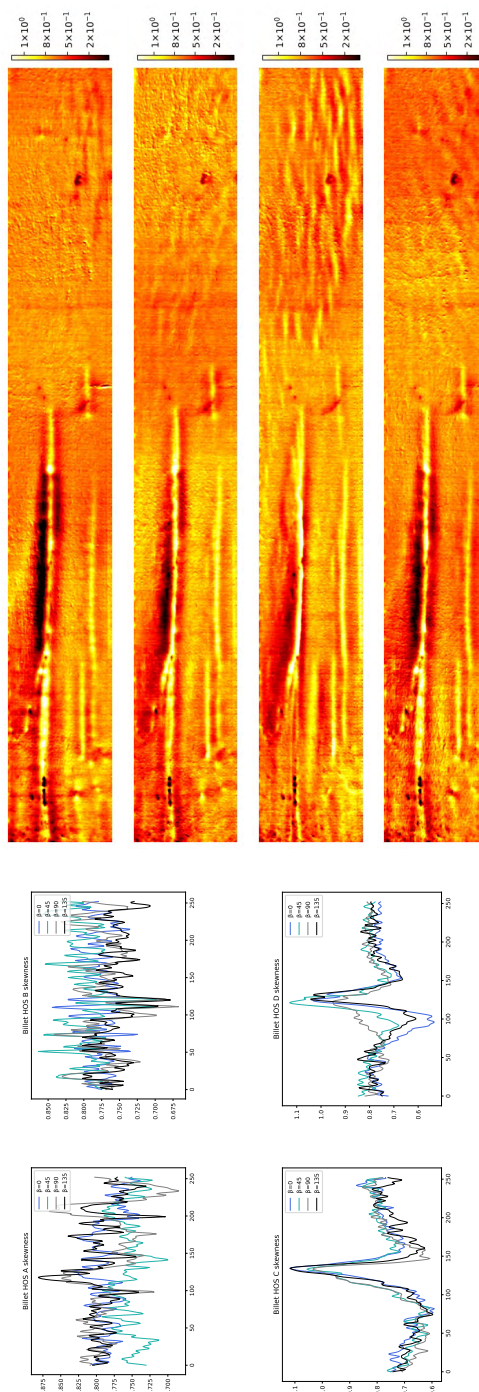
Steel billet Skewness, cooling thermogram..
